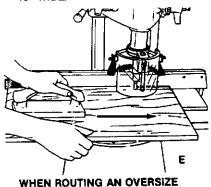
The distance from the outer edge of the workpiece to the bit determines the setup.
